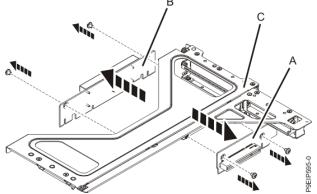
Removing the PCIe riser cards from the PCIe adapter cage
